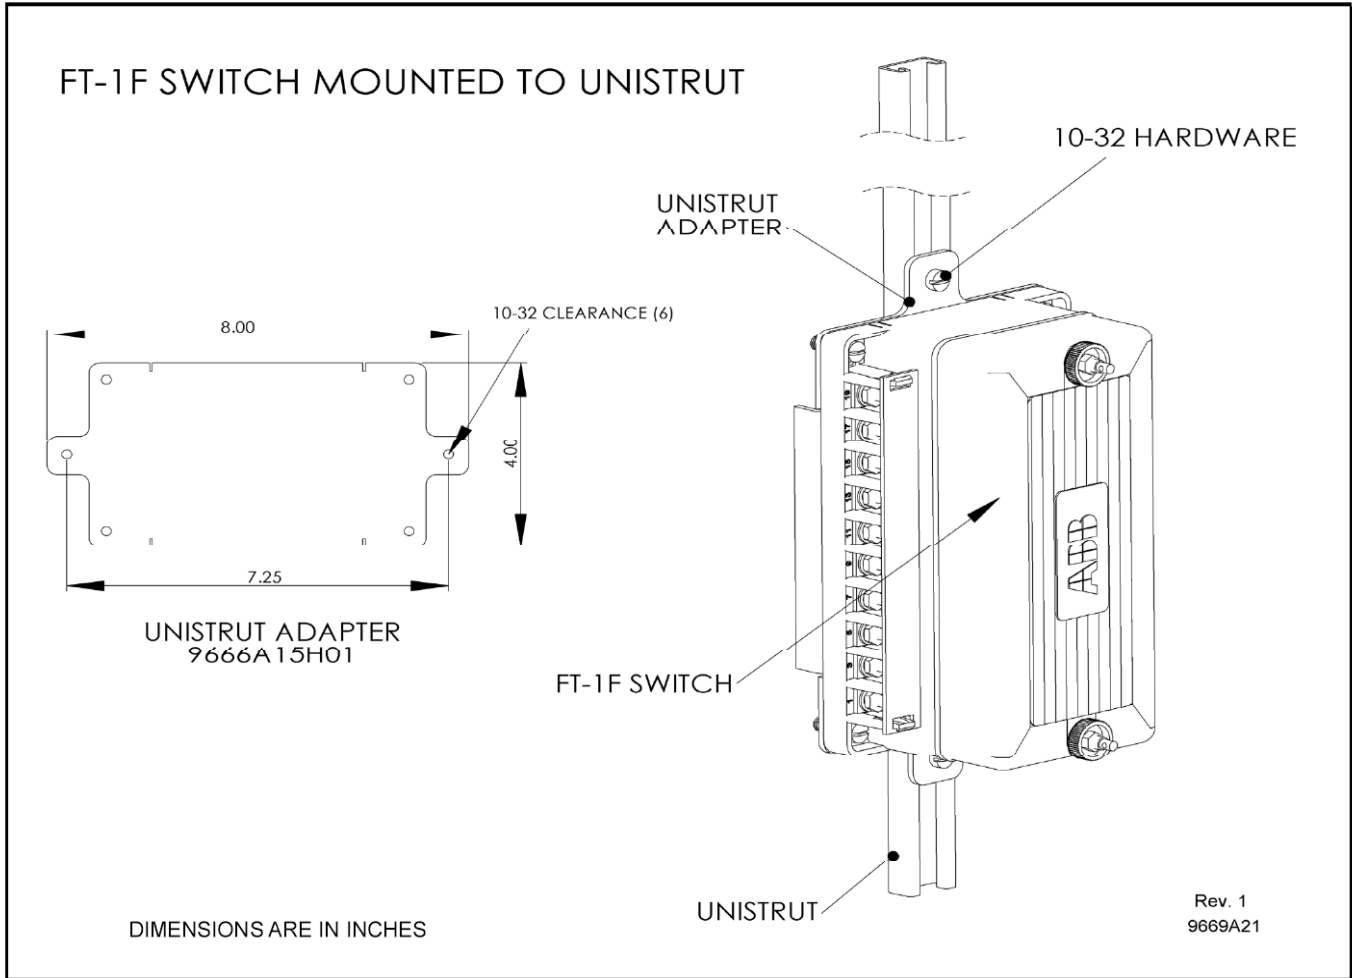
Railmount View of FT-1F using Unistrut Adapter
